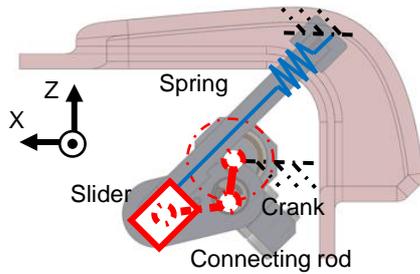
Spring and linkage model of the tongue blade mechanism.
